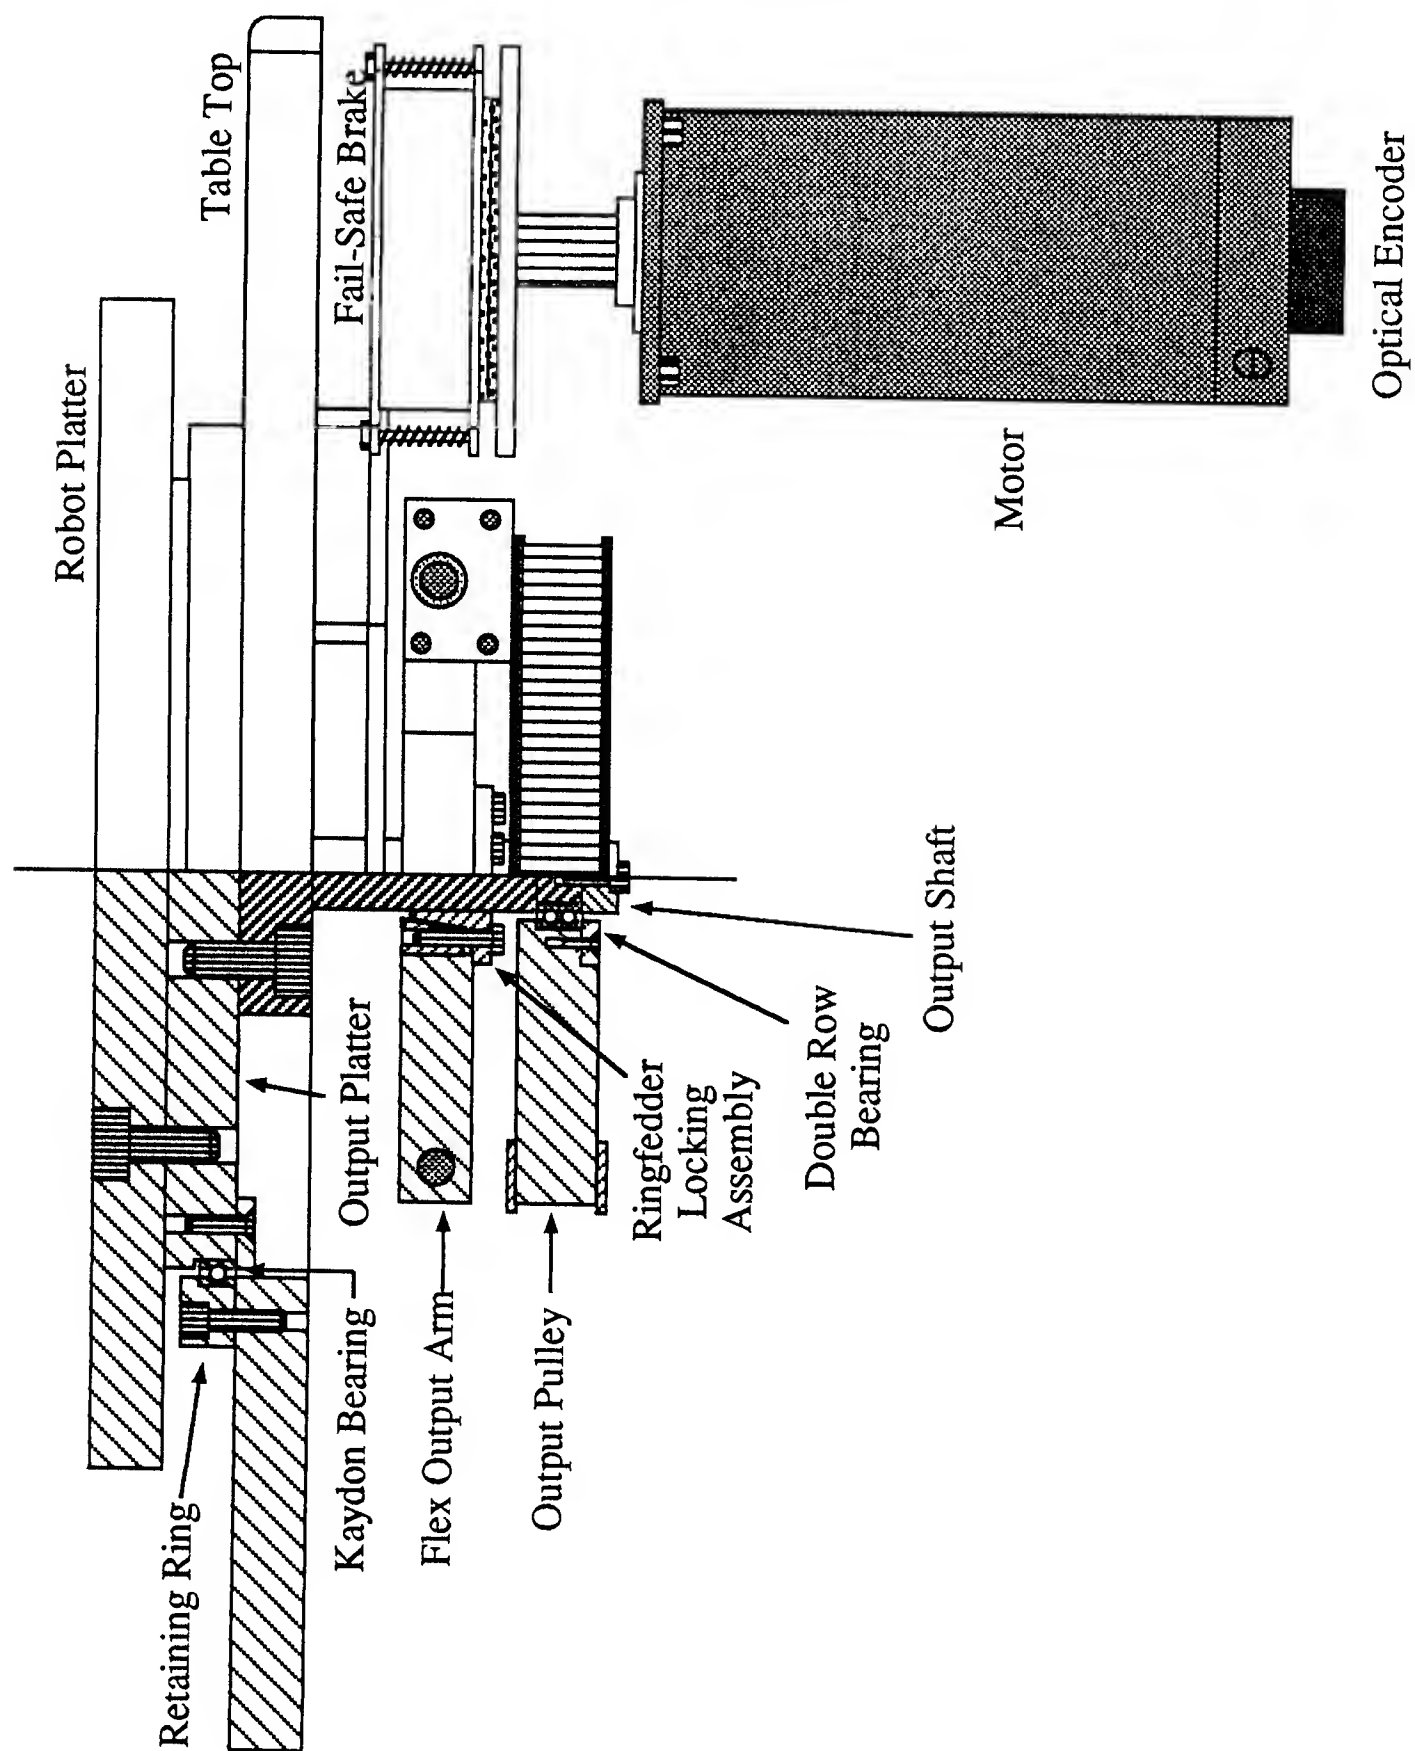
Cross-sectional view of the base components. On the left side, a cutaway view shows the general mounting scheme.
